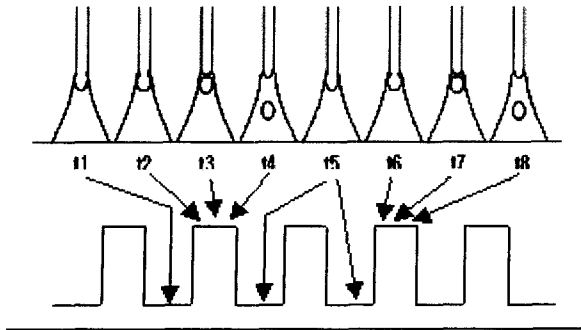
Schematic of metal transfer on pulse welding
